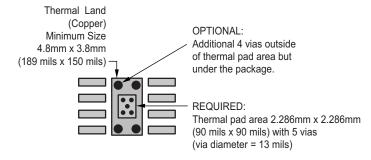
8-Pin PowerPAD PCB Etch and Via Pattern
